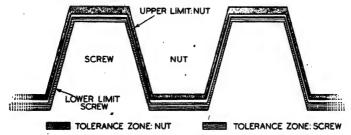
THREAD TOLERANCE ZONES-29° ACME THREAD
